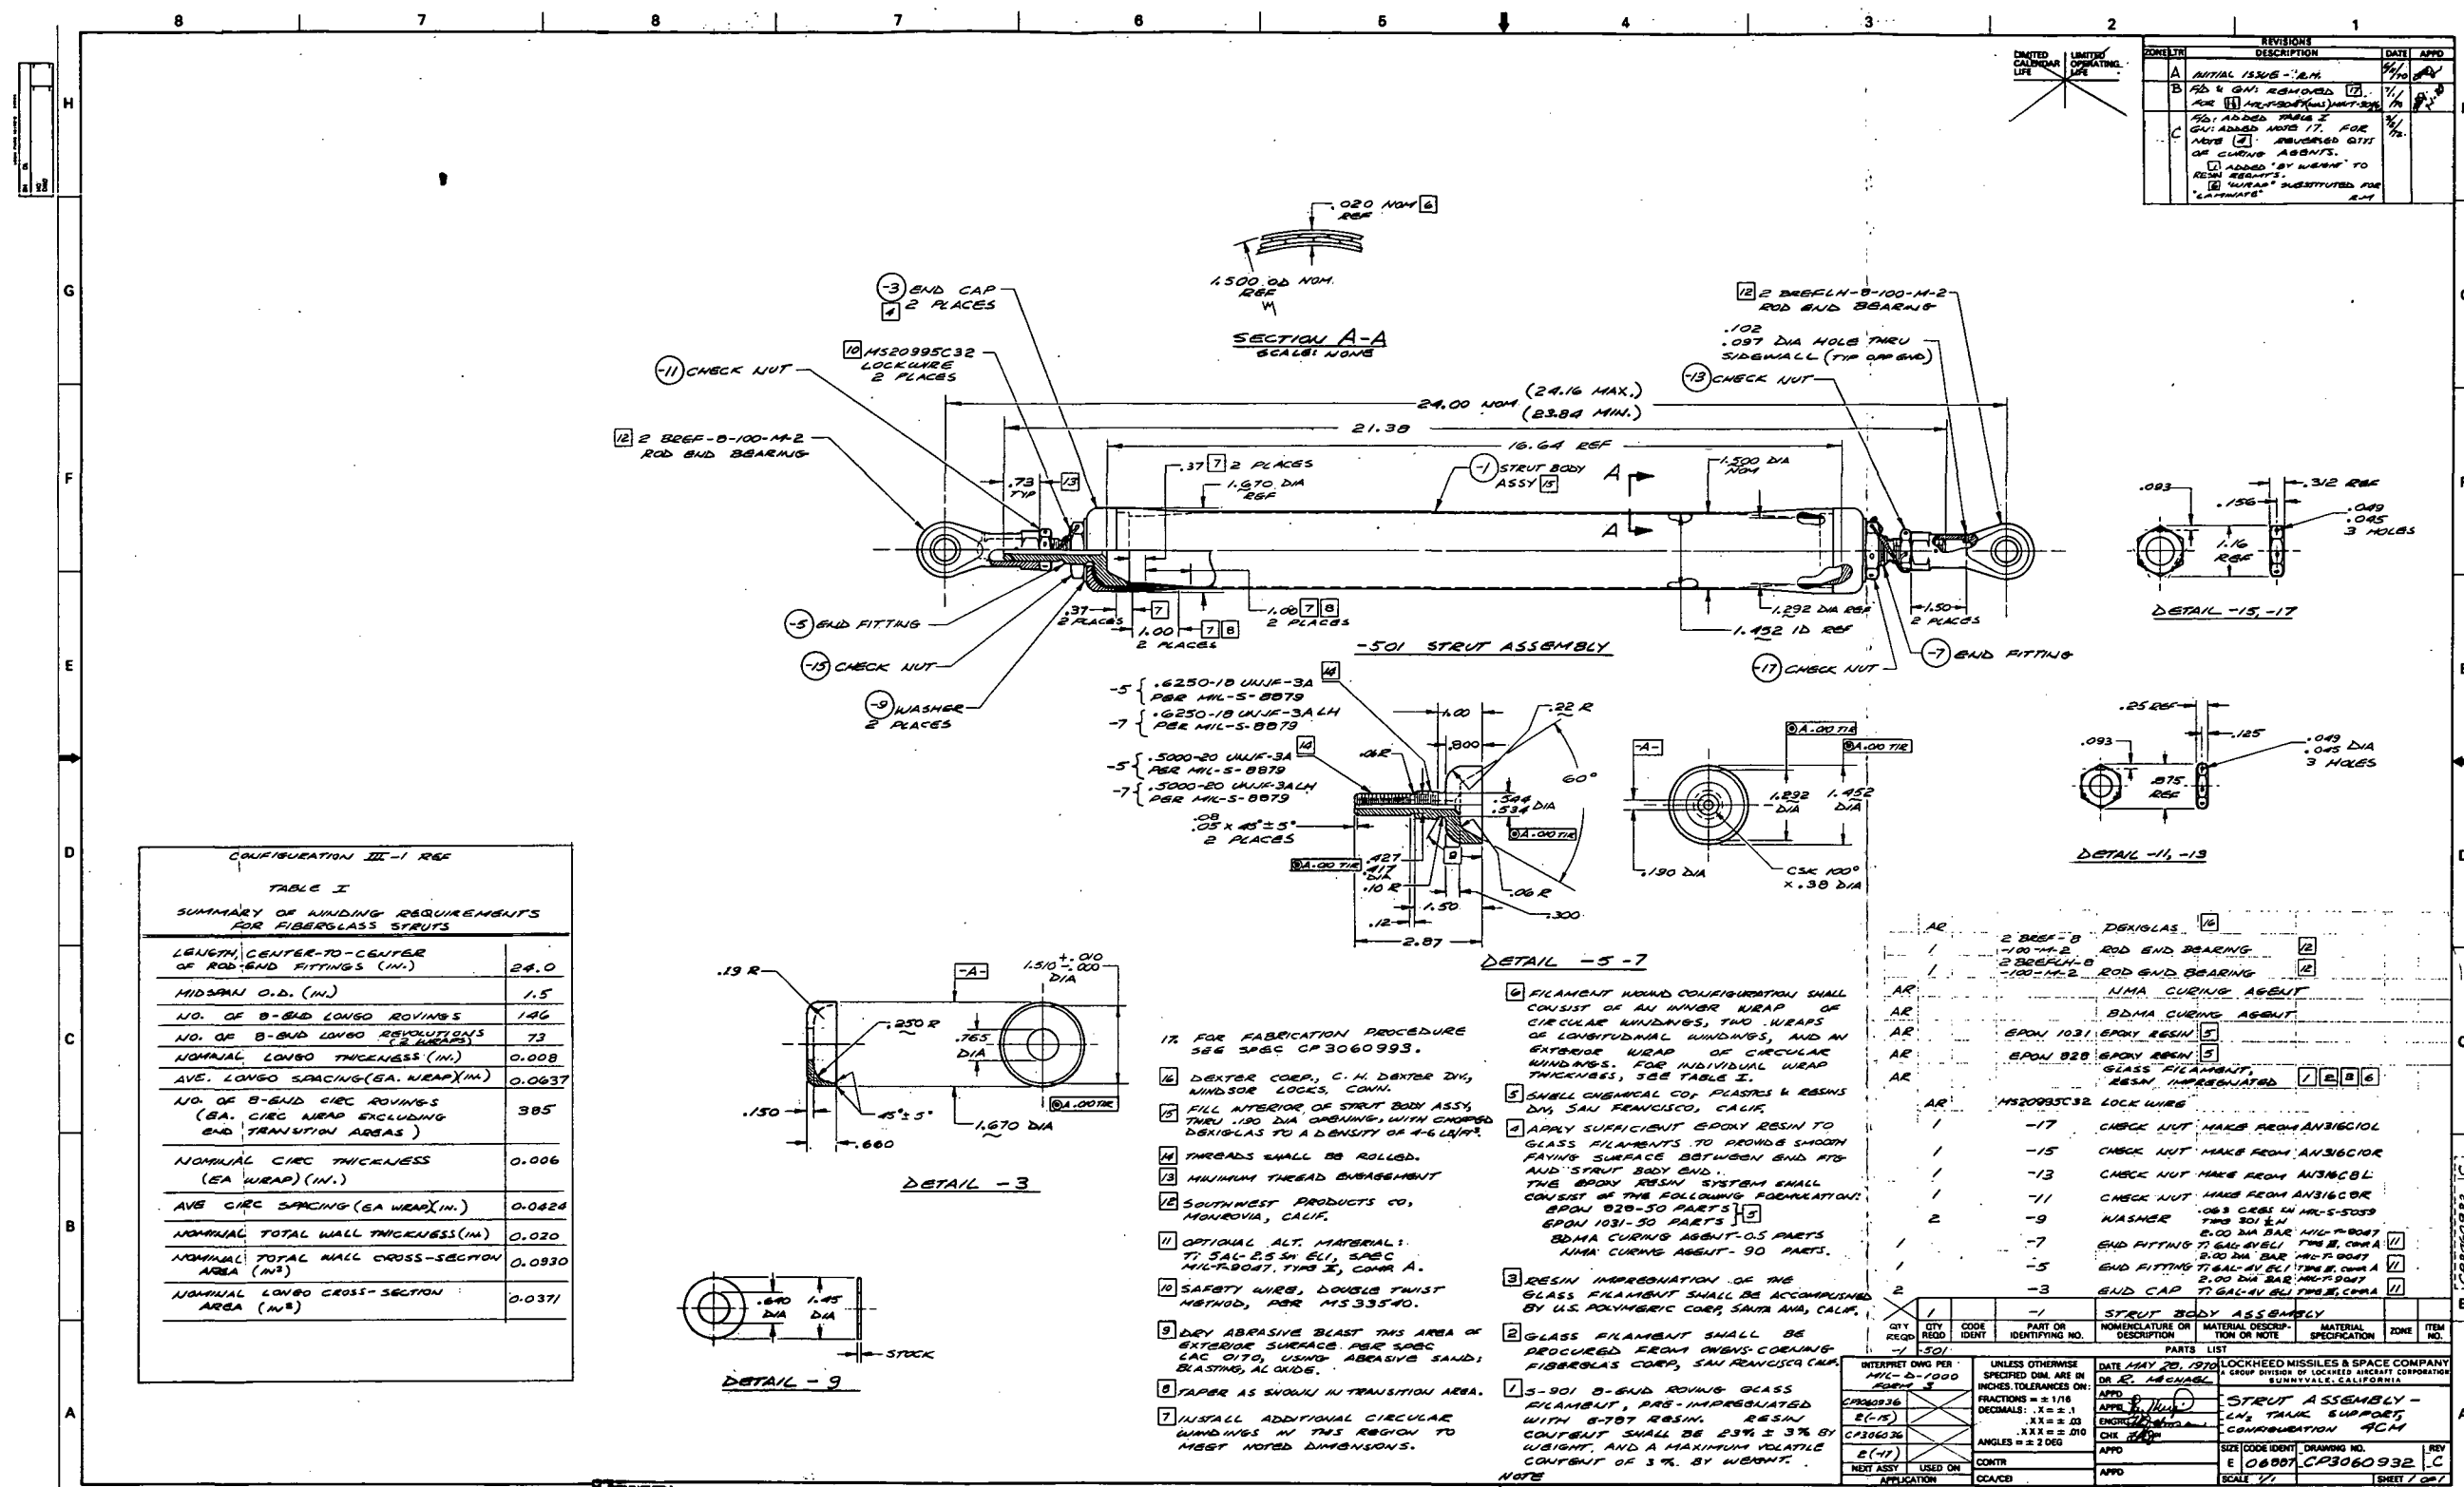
Design Assembly Drawing for Strut Configurations II-1 and III-1
